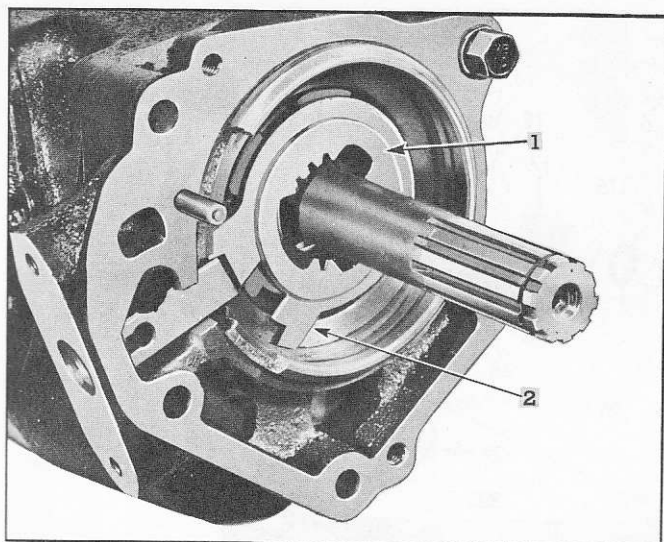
B—Control Plate, Blocker Ring and Pawl Positions for Assembly
